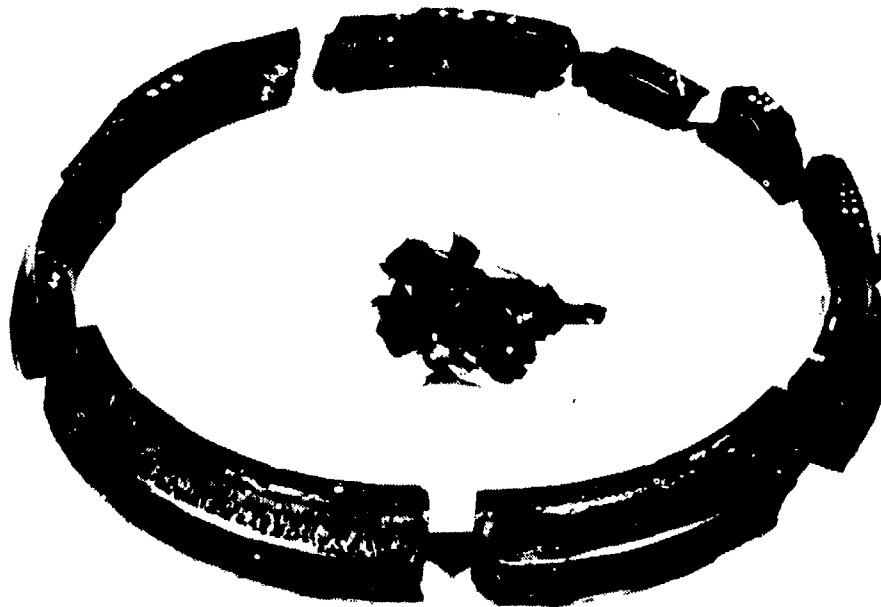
Fractured bearing inner race initiated by a rolling-element fatigue spall.
